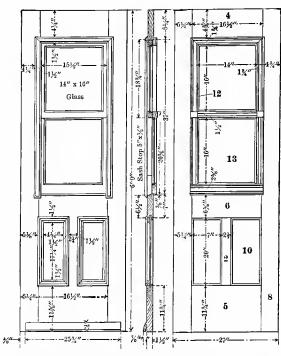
Wooden End Door for New York, New Haven & Hartford Coaches.
